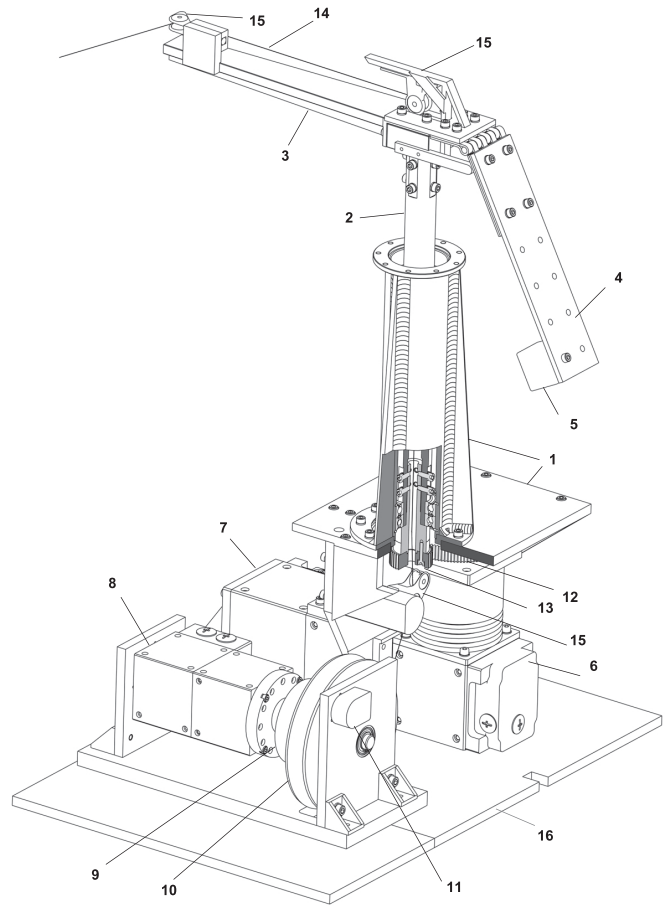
View of the 3D casting manipulator with detail of its components (1. hub, 2. hollow shaft, 3. arm, 4. counterbalancing bar, 5. counterweight, 6. second link's motor, 7. tilt motor, 8. reel's motor, 9. electromagnetic clutch, 10. reel, 11. optical encoder, 12. driving gear, 13. driven gear, 14. cable, 15. pulleys, 16. rover's platform).
